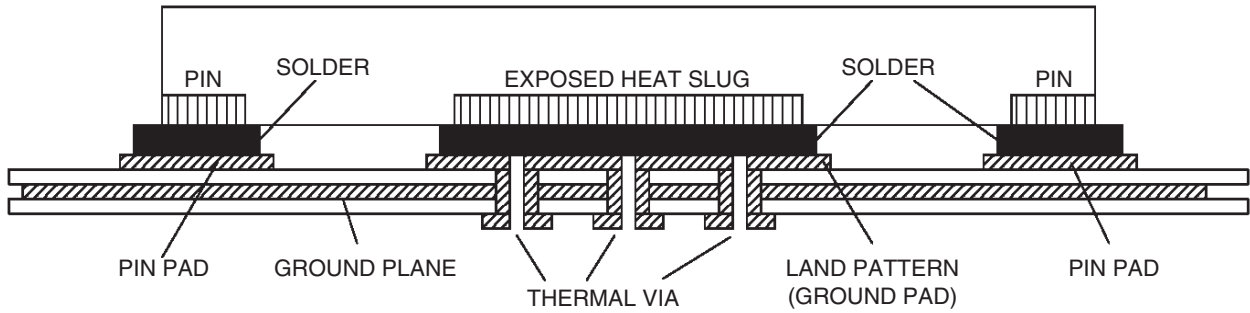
P.C. Assembly for Exposed Pad Thermal Release Path – Side View
